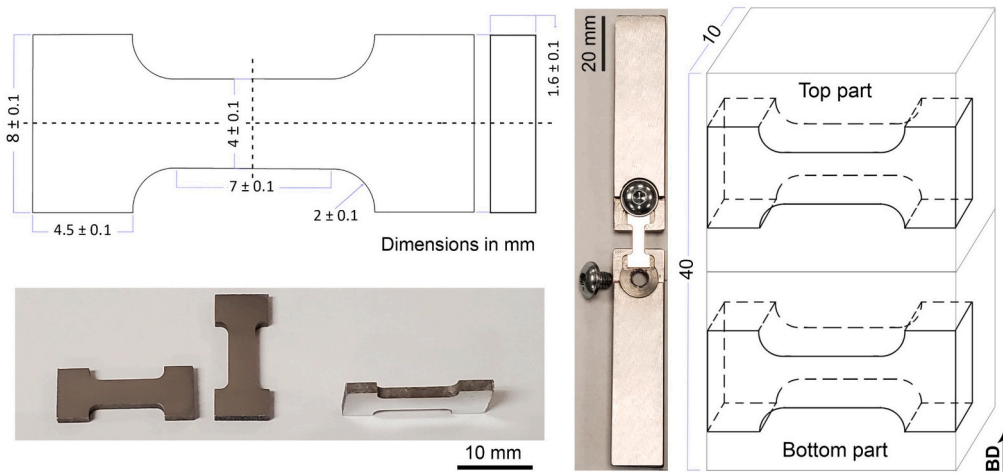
Layout of printed coupons, tensile samples, fixture, and corresponding dimensions.
